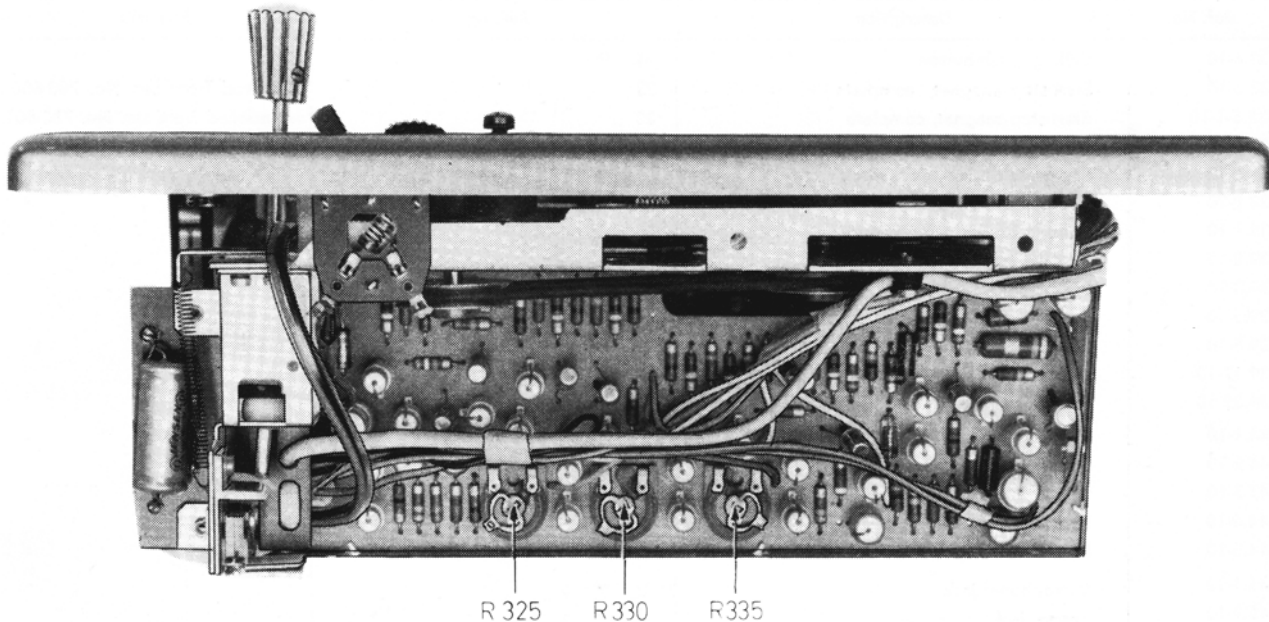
Side view of the tape recorder showing the step 1 amplifier board.
